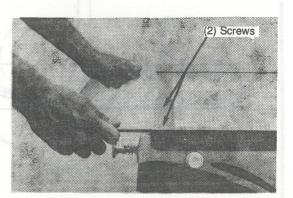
Sliding out the glass. Remove the two screws shown, then carefully slide out the glass.
